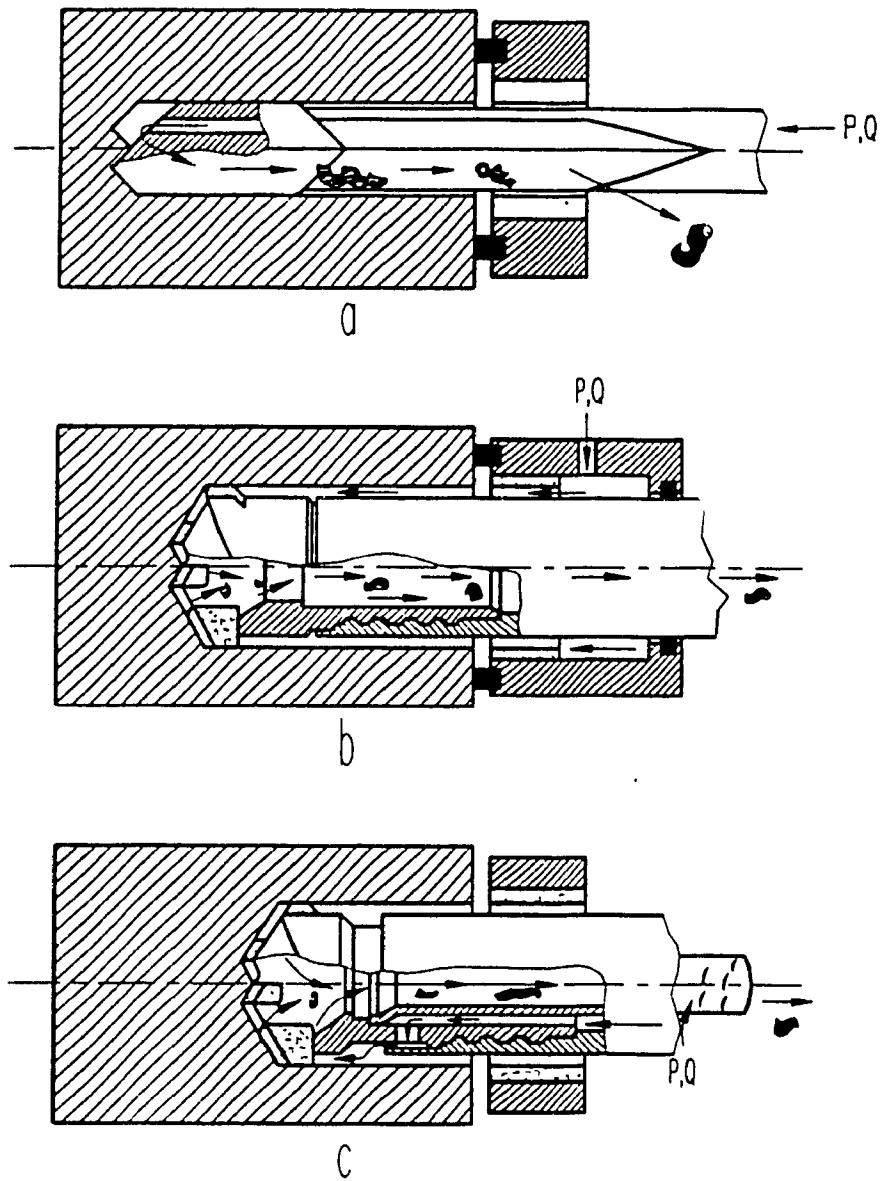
Types of self-piloting tools (a) Gundrill (b) BTA drill (c) Ejector drill
